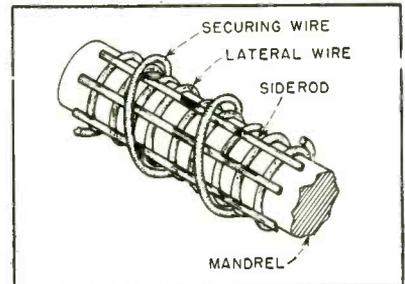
Inside-out grid strip assembly, showing mandrel, lateral wire, siderods and external securing wire
